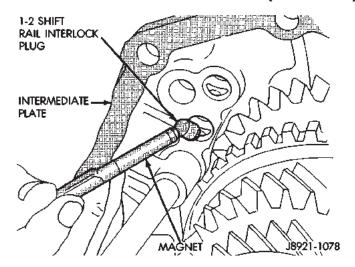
Install 1-2 Shift Rail Interlock Plug
